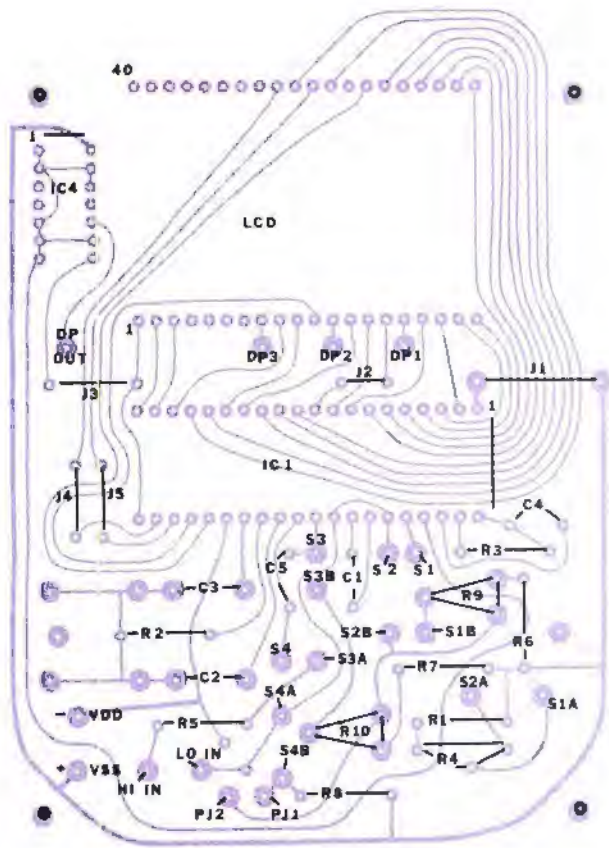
Actual size etching and drilling guide for the pc board for the LCD display meter is shown at right, component placement above.
